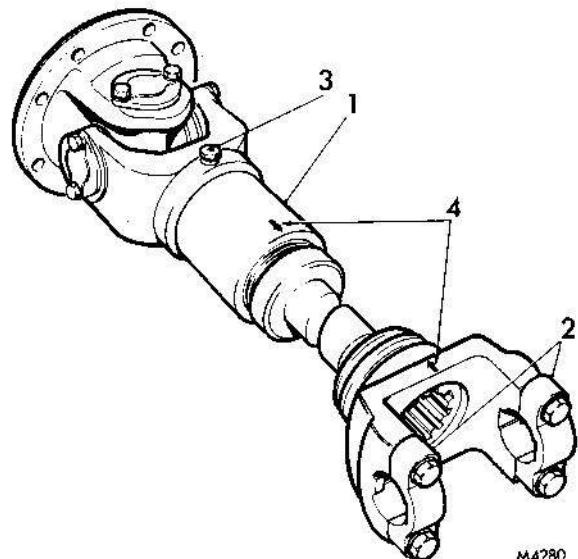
PROPELLER SHAFT WITH YOKE COUPLING
